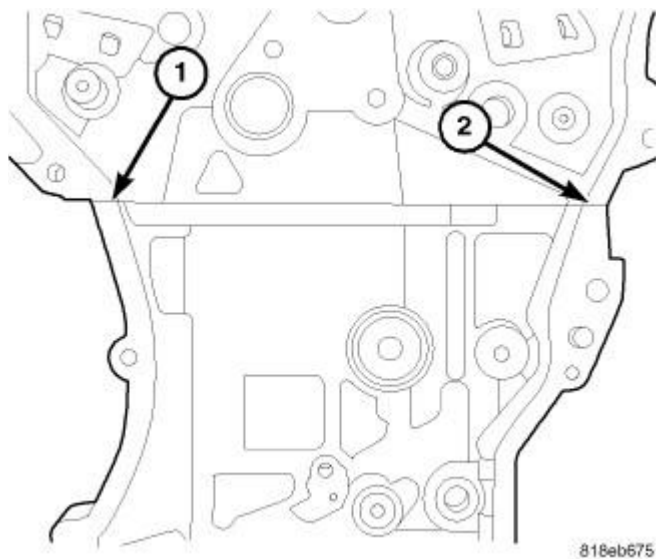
Applying Engine Sealant RTV (Or Equivalent) At Cylinder Head To Block Parting Line
